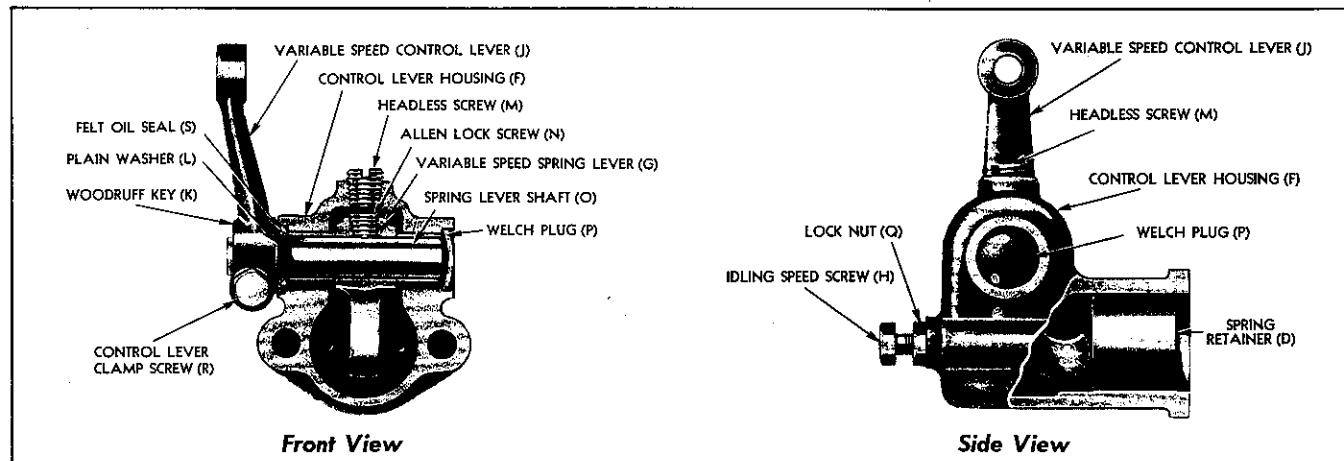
Variable Speed Governor Control Housing and Lever Assembly.
